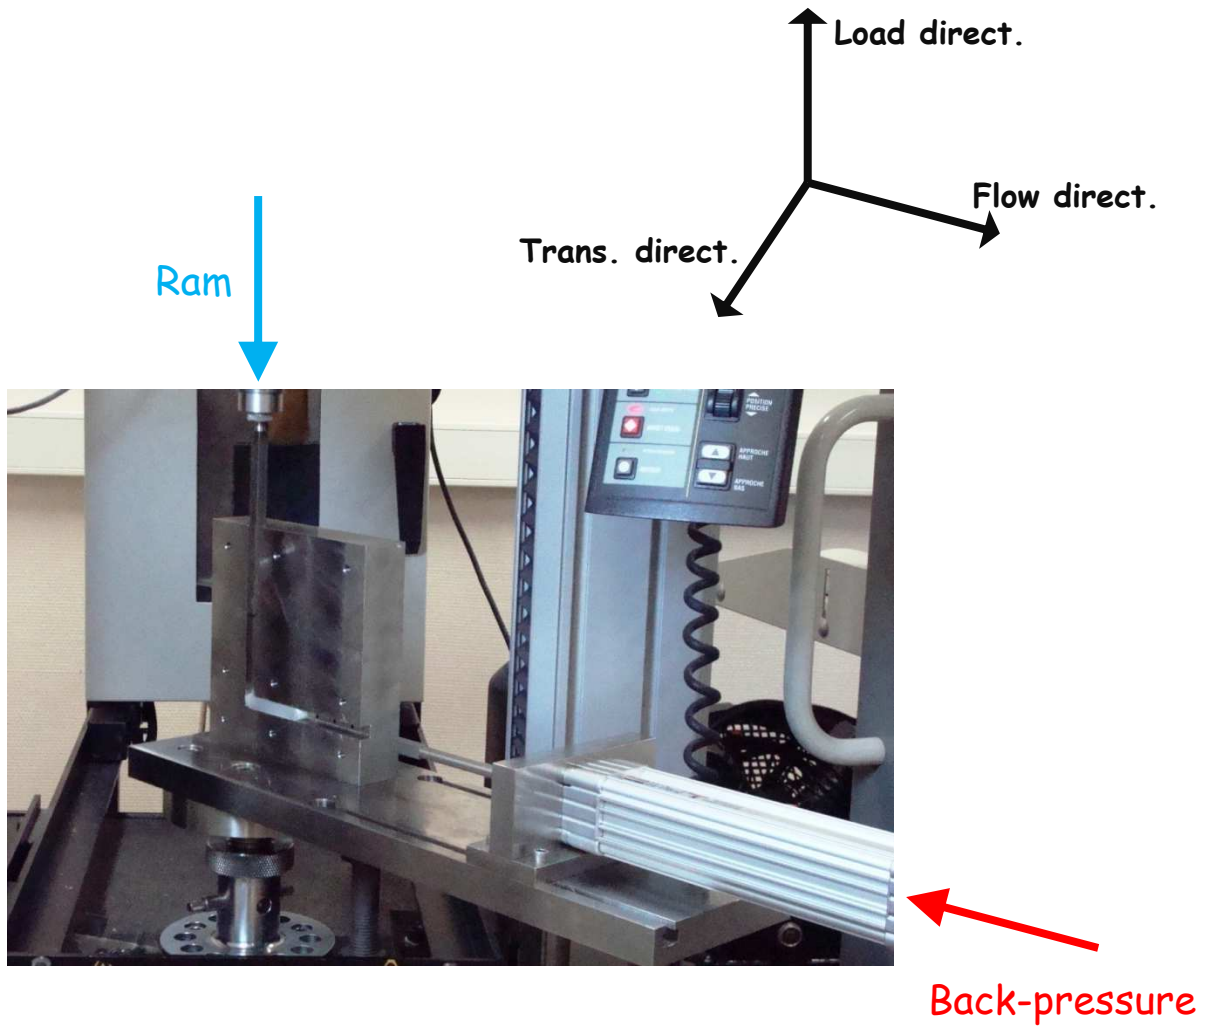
Solid state extrusion equipment placed in the testing machine. The drawing shows the processing routes A and C.
